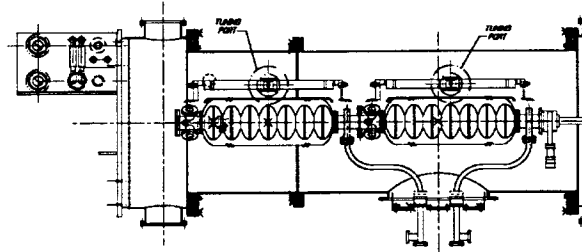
Horizontal Test Bed for the tuner, coupler, and cavity prototypes
